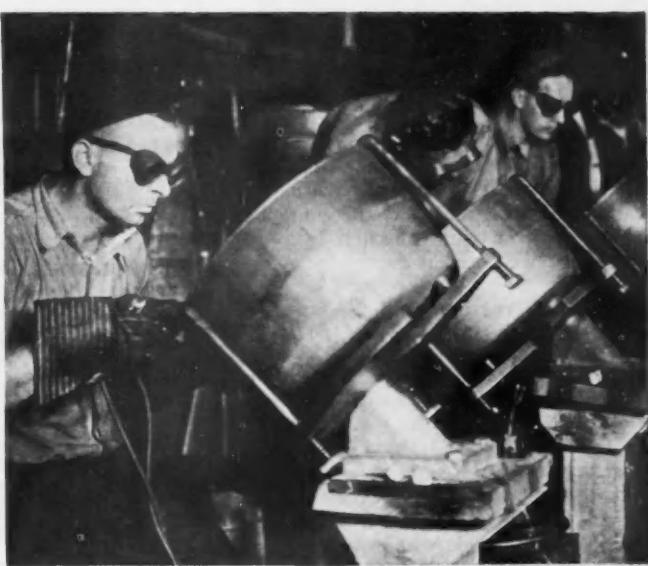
A rather fussy job is the welding in place of fittings. Special quick acting jigs are provided.
